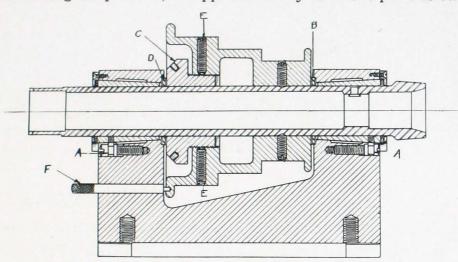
Sectional Drawing of Headstock Showing Construction.
